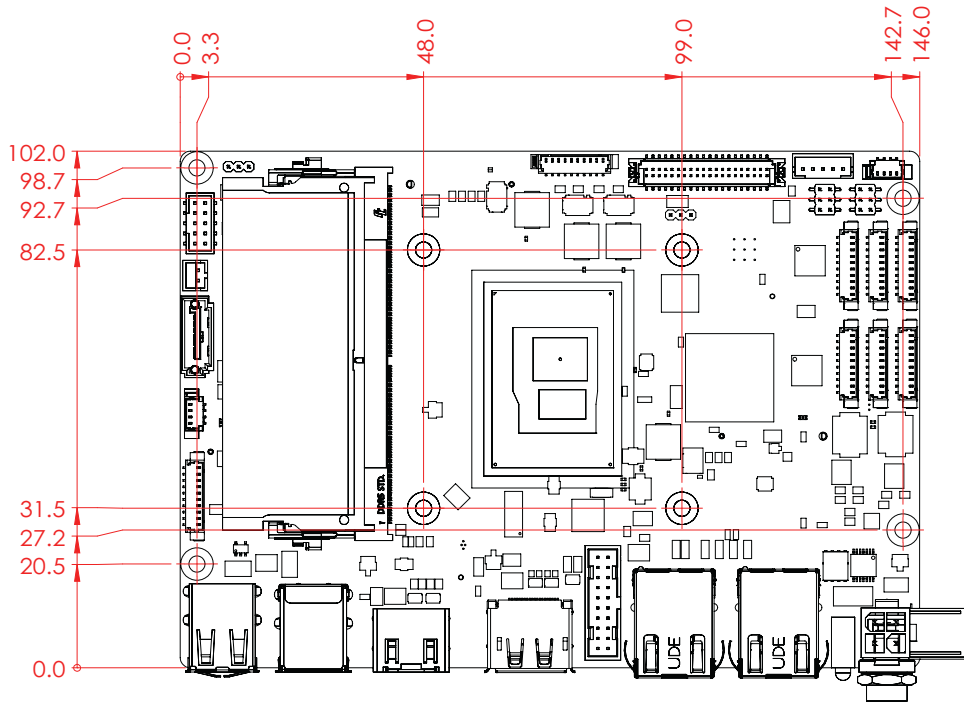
MIO-5154 Mechanical Drawing (Top Side)
